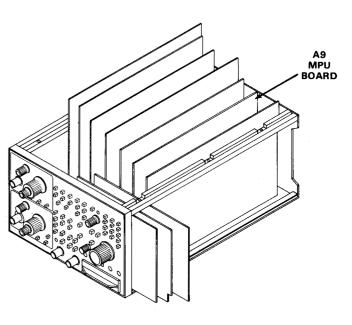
B. A9-MPU circuit board assembly (SN B061869 & below).
